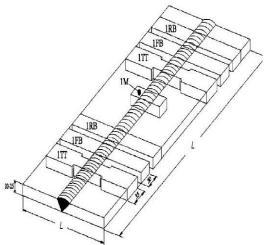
2 Additional butt weld testing for welding in the lower position:
